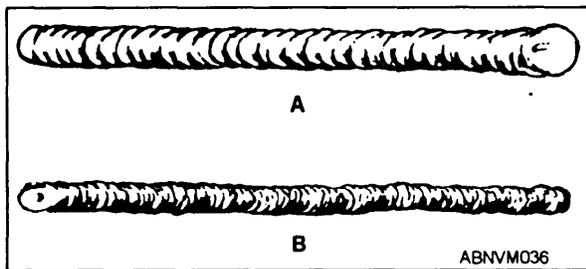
Comparative GTA weld beads with filler rod manipulation.
